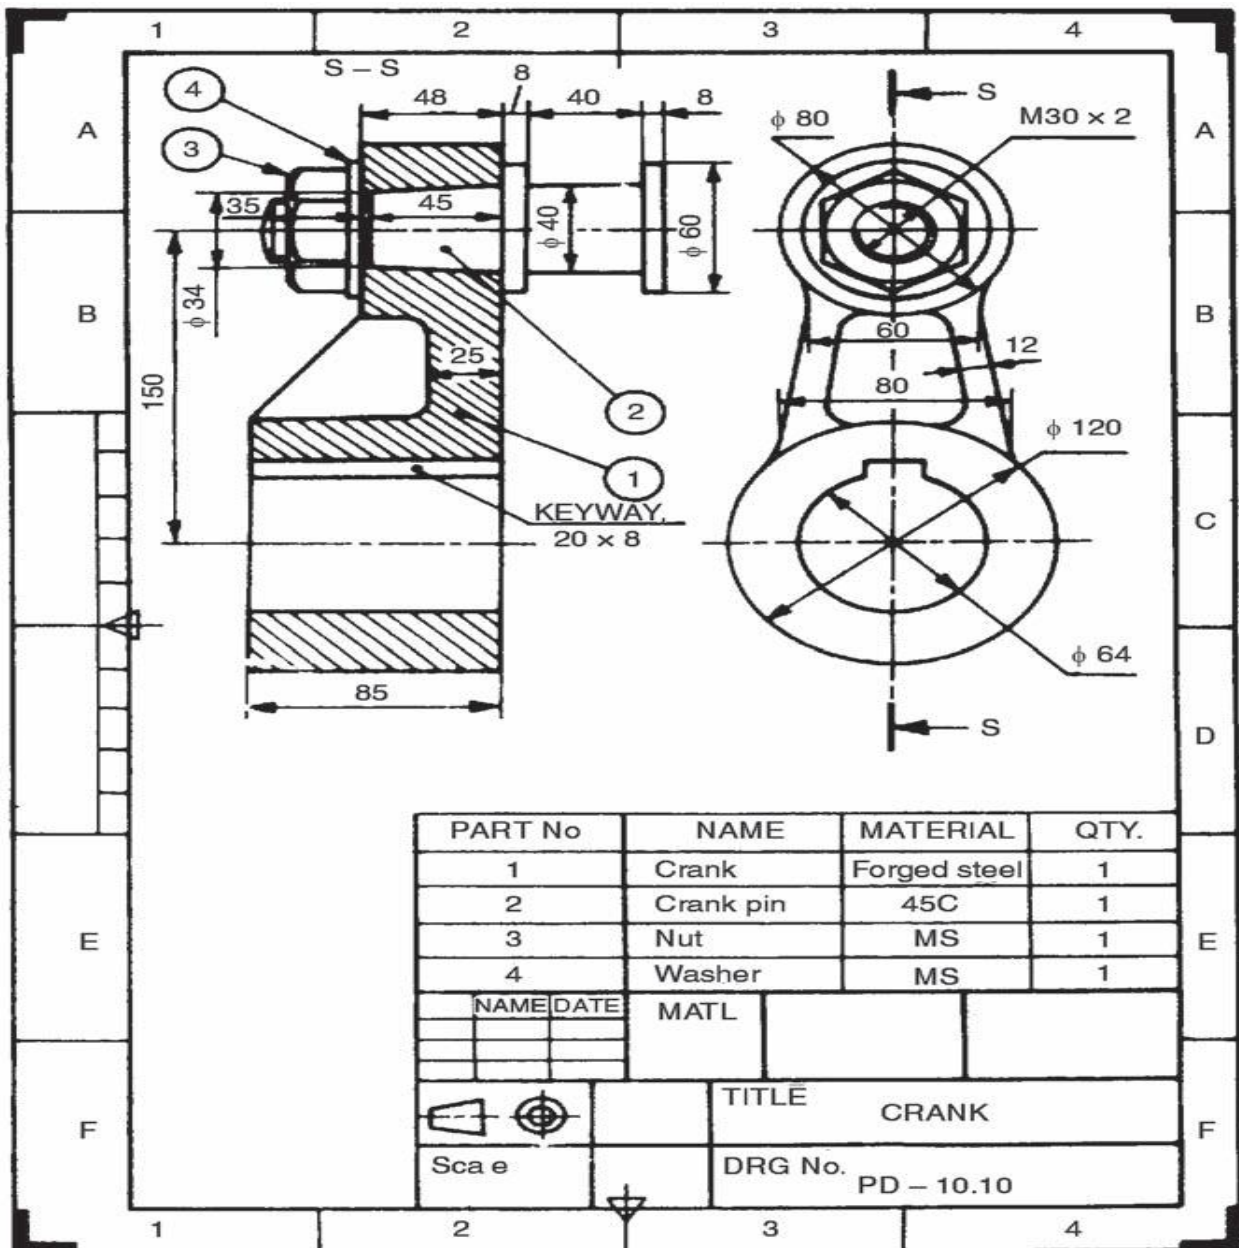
drawing operation sheet 5.2:assembly drawing
